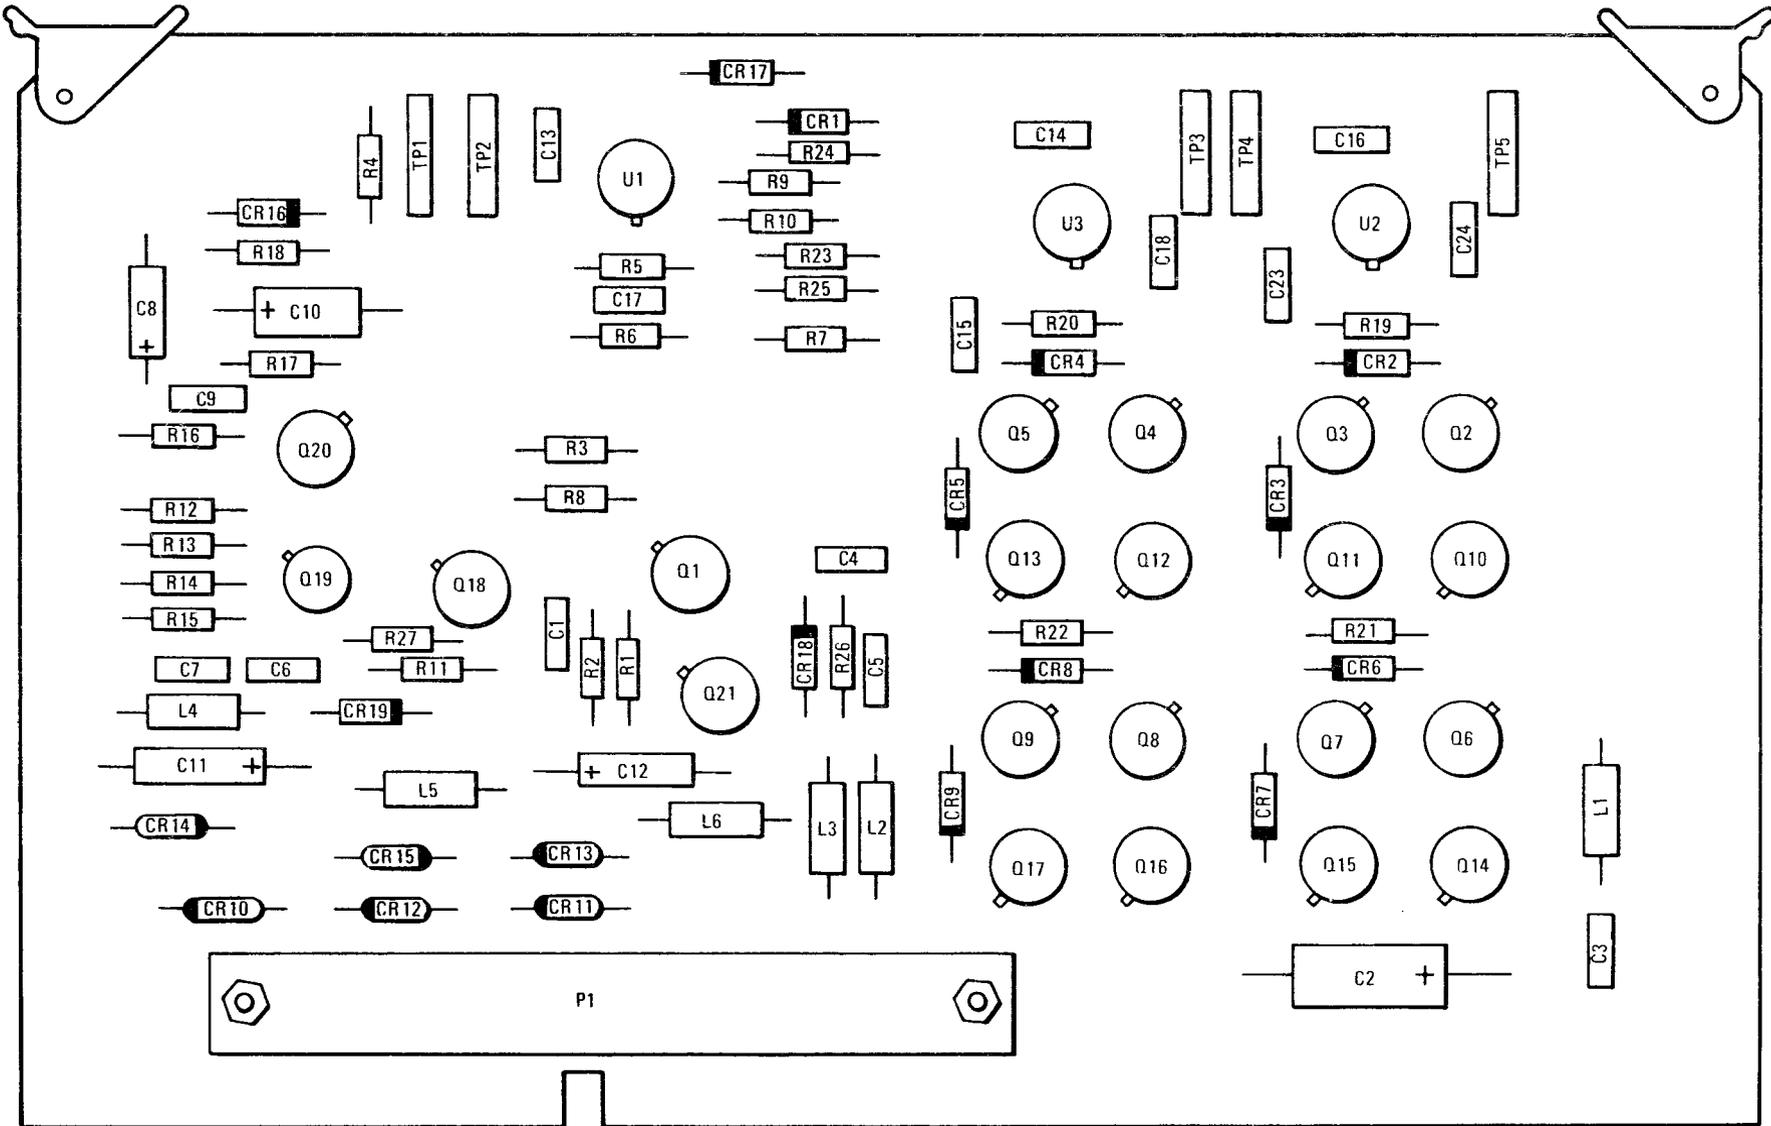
Inductive RF Tuner Assembly 2A5 Component Lead Identification Details
